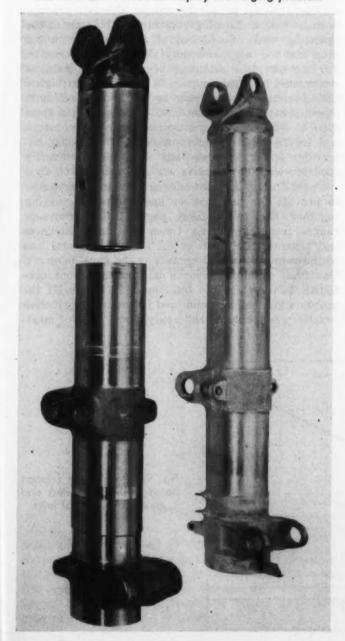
Left—Flash welded tubular aircraft strut on which the end is electric upset to form a flange
